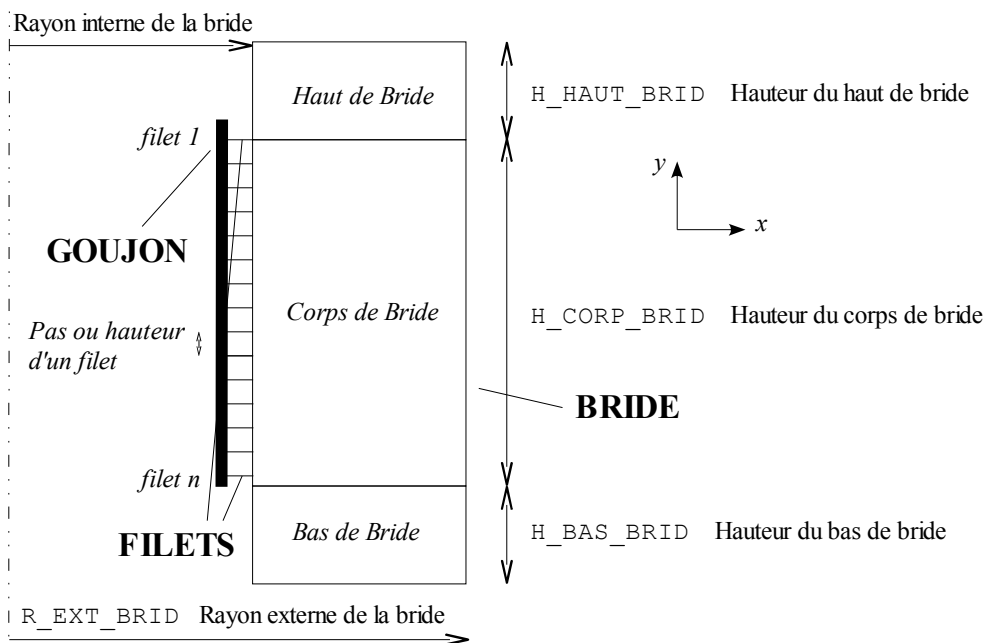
a: description of the various geometrical parameters assembly pin-attaches
